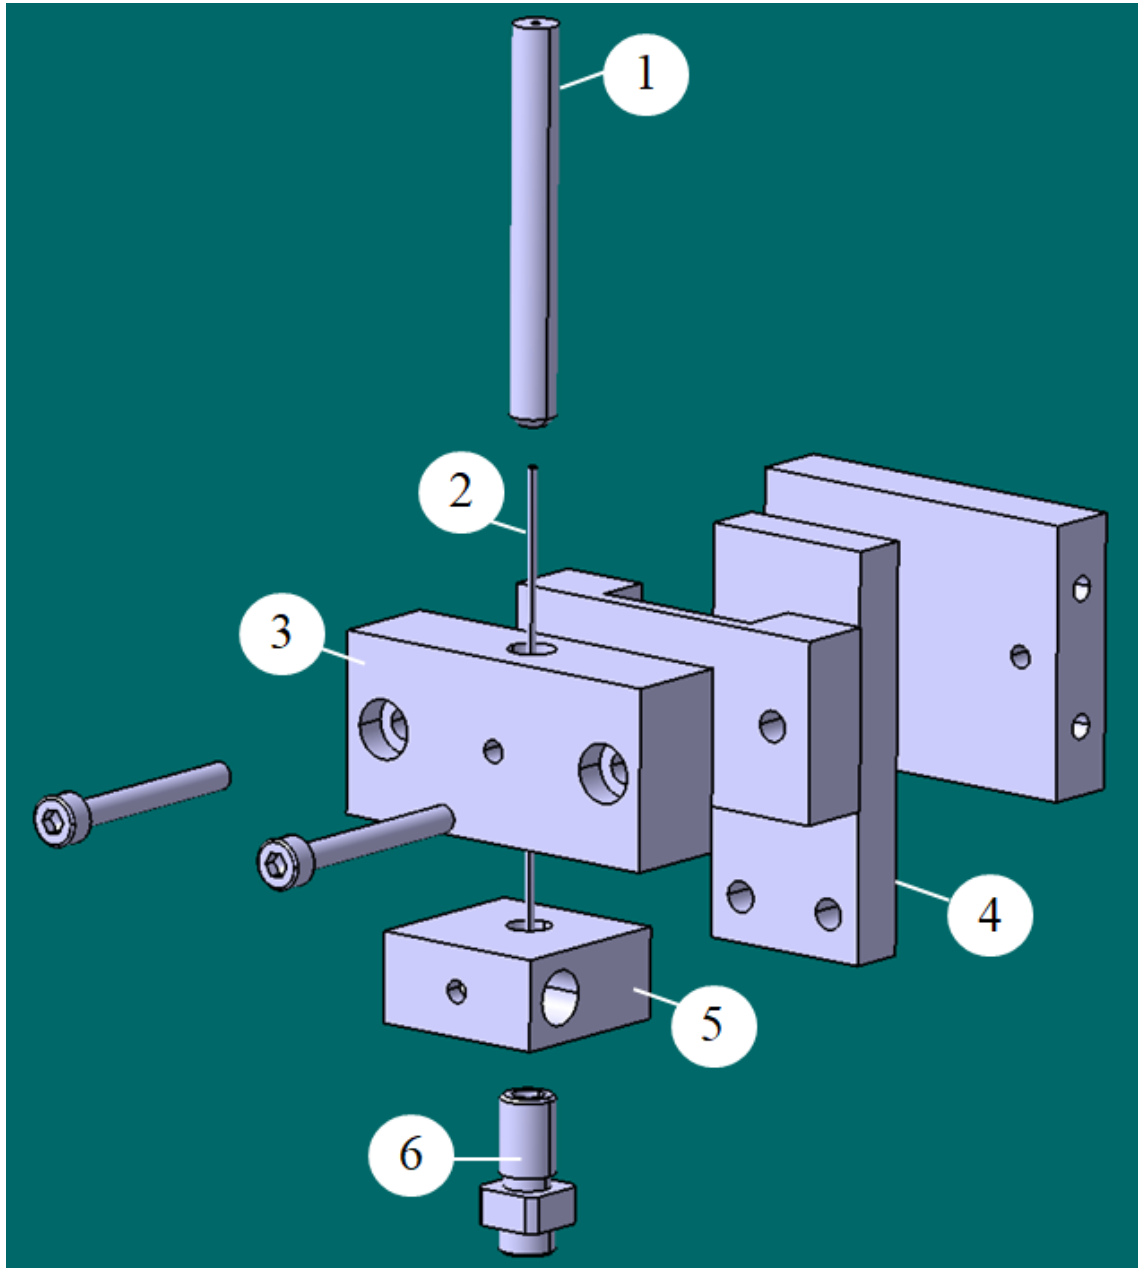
Exploded view of the print head, 1: guiding tube, 2: filament tube, 3: filament tube fixation, 4: Insulation, 5: heat block, 6: nozzle
